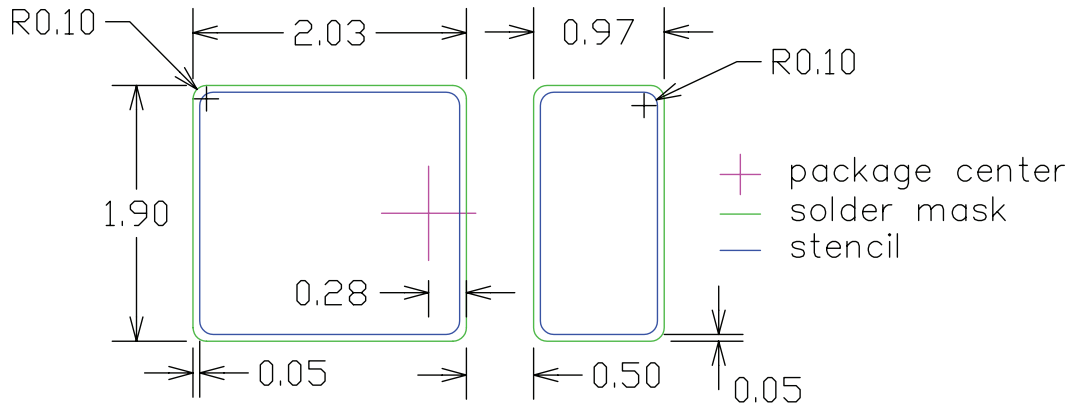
Recommended PCB solder pad layout for LUXEON 2835 Line.
